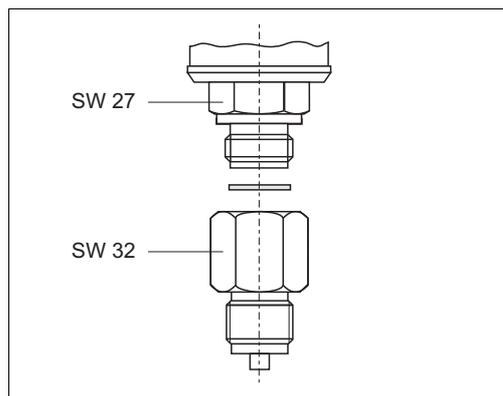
The flush-mounted version is screwed together with the adapter using a torque of 50 Nm. Screw the complete device into the process thread with max. 80 Nm (at AF 32).
